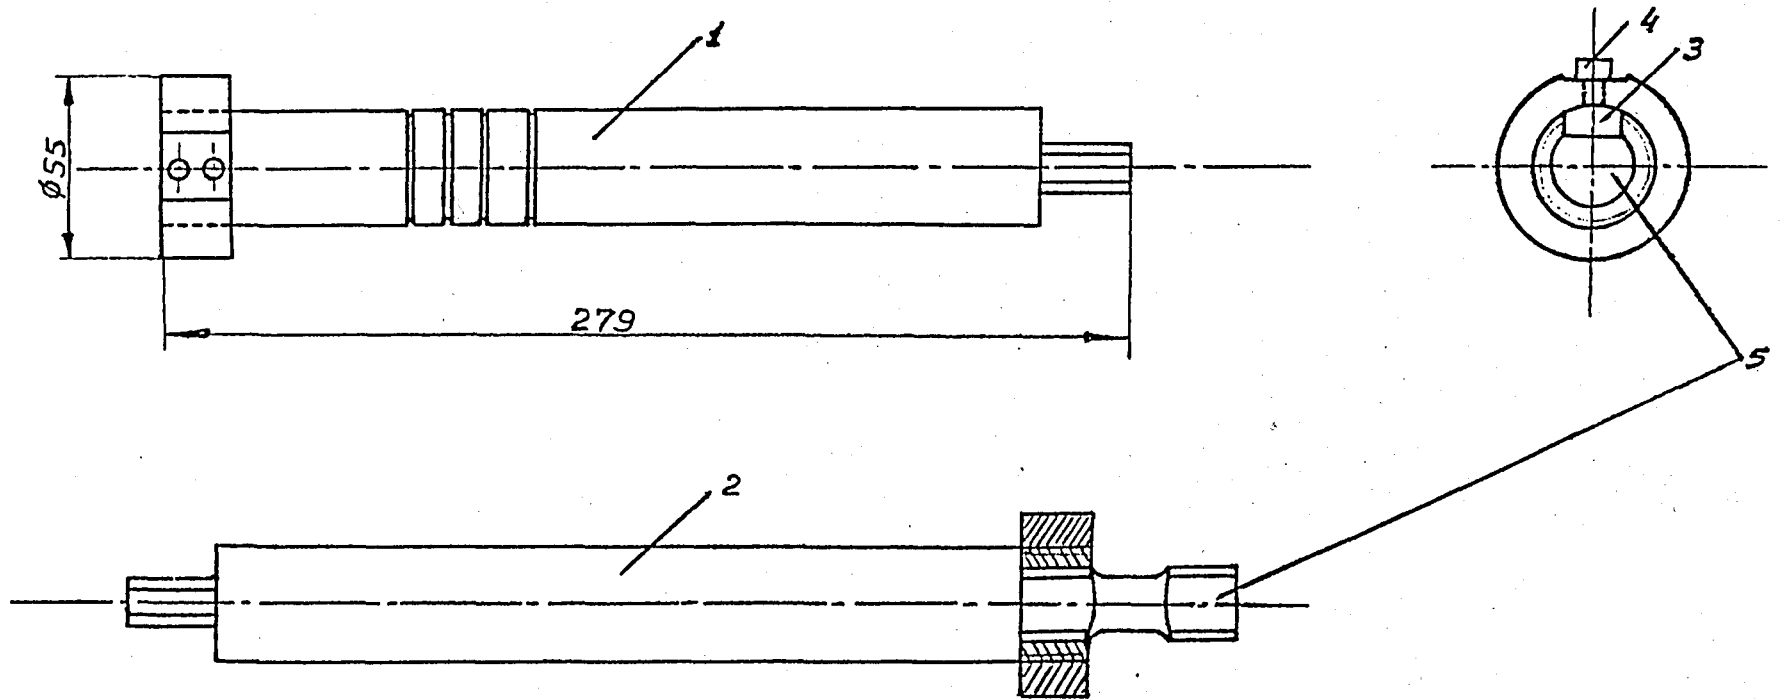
Extension rods and specimen joining system. (1) Upper Extension Rod; (2) Lower Extension Rod; (3) Key; (4) Bolt; (5) Specimen.
